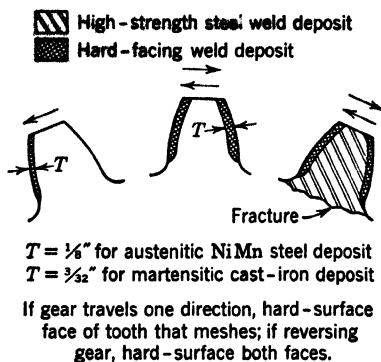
B. Method of Building up Gear Teeth with Carbon-Steel Welding Rod and Hard-Facing the Wearing Face.
